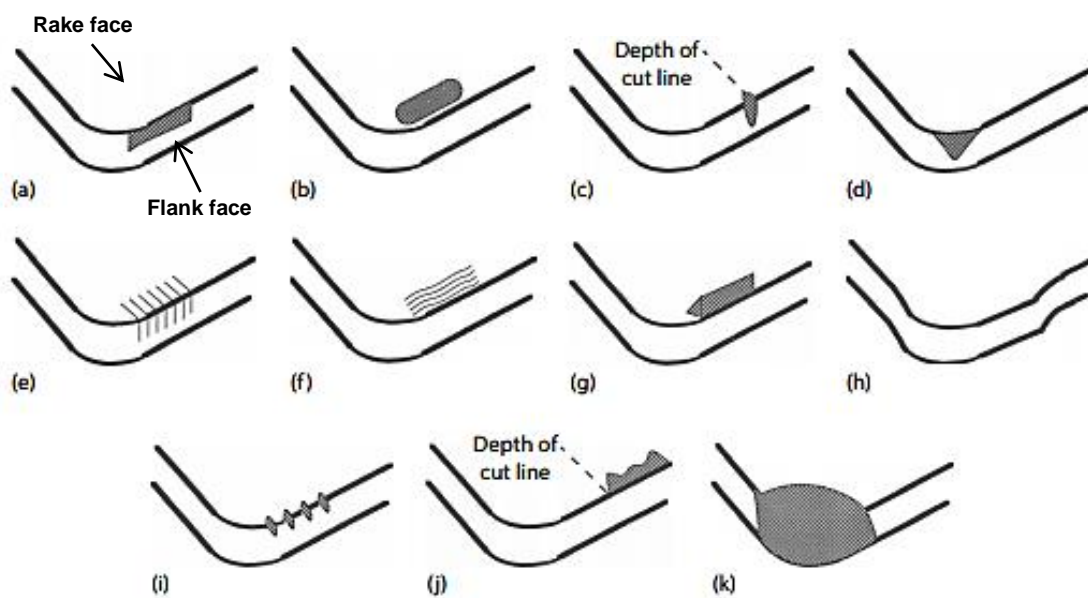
Types of wear on cutting tools: (a) flank wear, (b) crater wear, (c) notch wear, (d) nose radius wear, (e) thermal cracks, (f) mechanical cracks, (g) built-up edge, (h) gross plastic deformation, (i) edge chipping, (j) chip hammering, (k) gross fracture [30].
